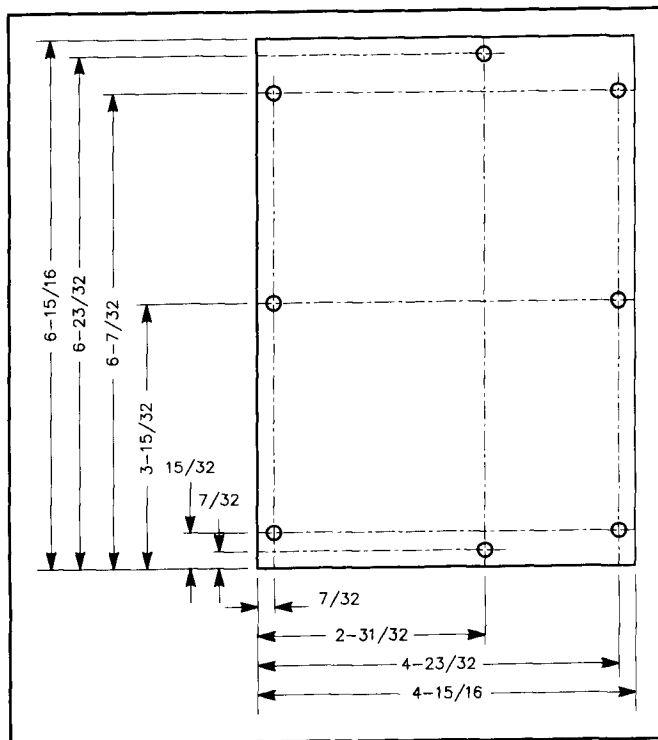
Side-chassis cover plates (2 required). Holes are No. 19. Use cover plates as templates to drill side chassis.
